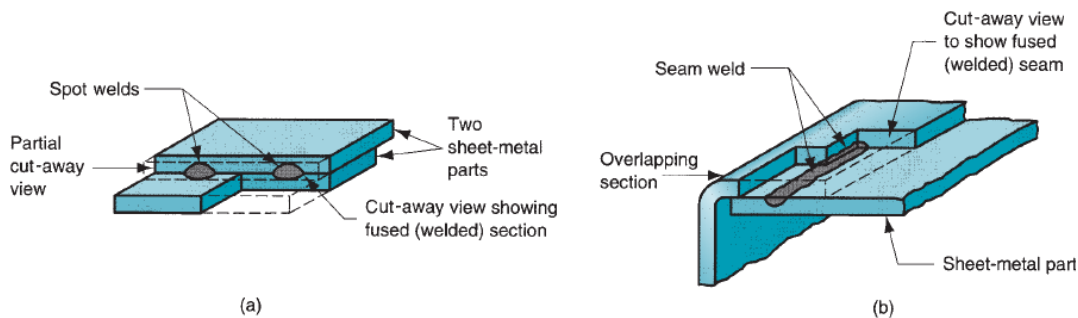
(a) Spot weld; and (b) seam weld.
